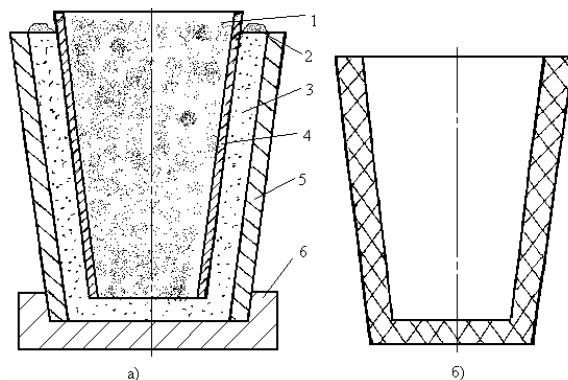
Conical configuration of mold: a) mold assembly; b) filter element; 1) termite; 2) powder batch; 3) internal insert; 4) metal form; 5) filling of internal cavity; 6) bottom
